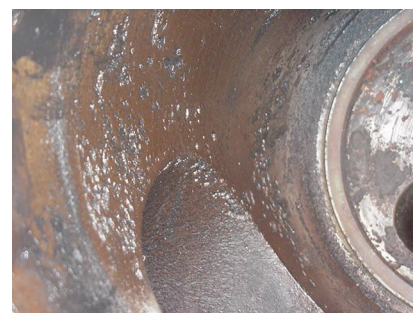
Erosion damage at the outlet of the gas passage to valve pocket
